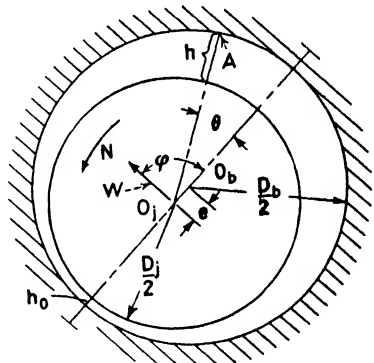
Definition sketch of an eccentric journal bearing.
